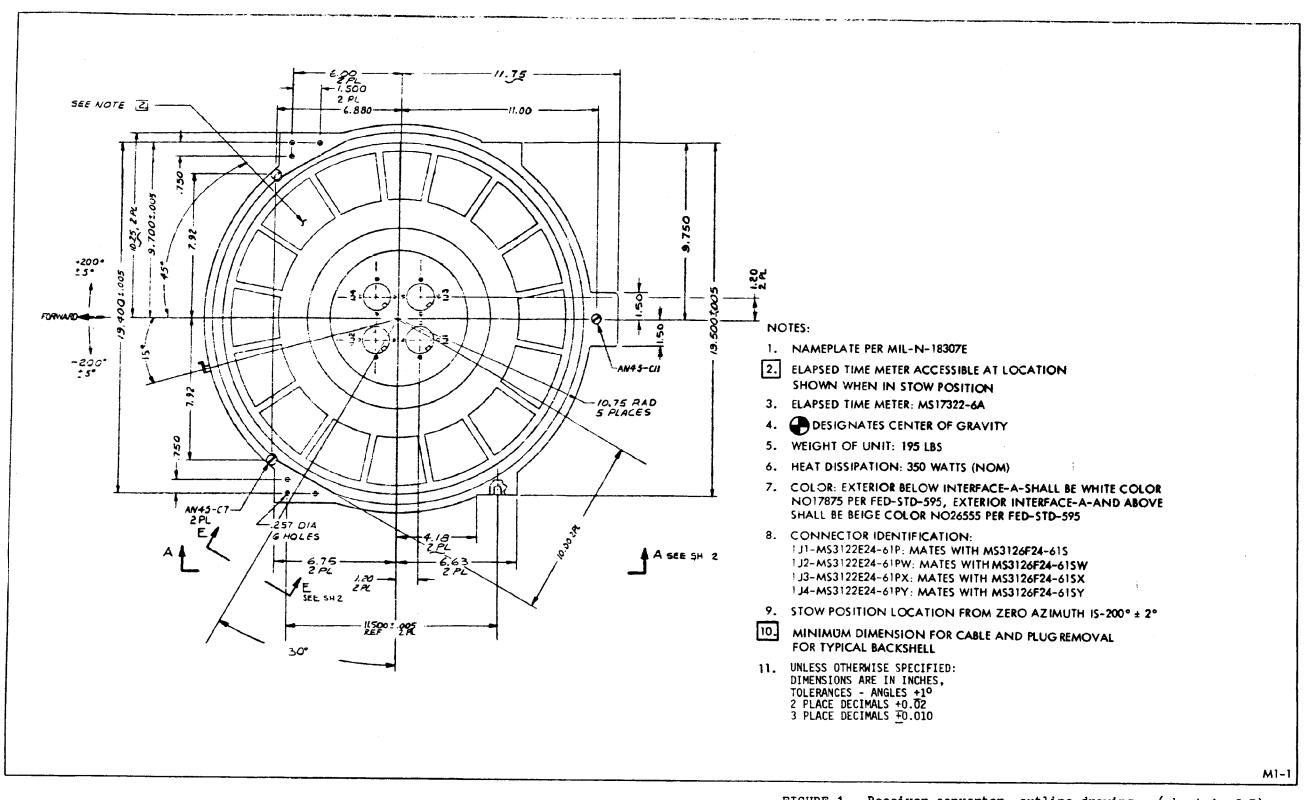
Receiver converter, outline drawing. (sheet 1 of 5)
